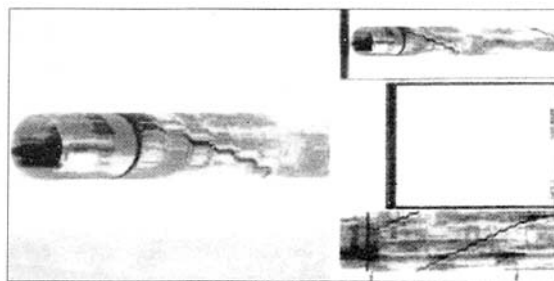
The downhole photograph of the fracture casing in Keshen-1 well
